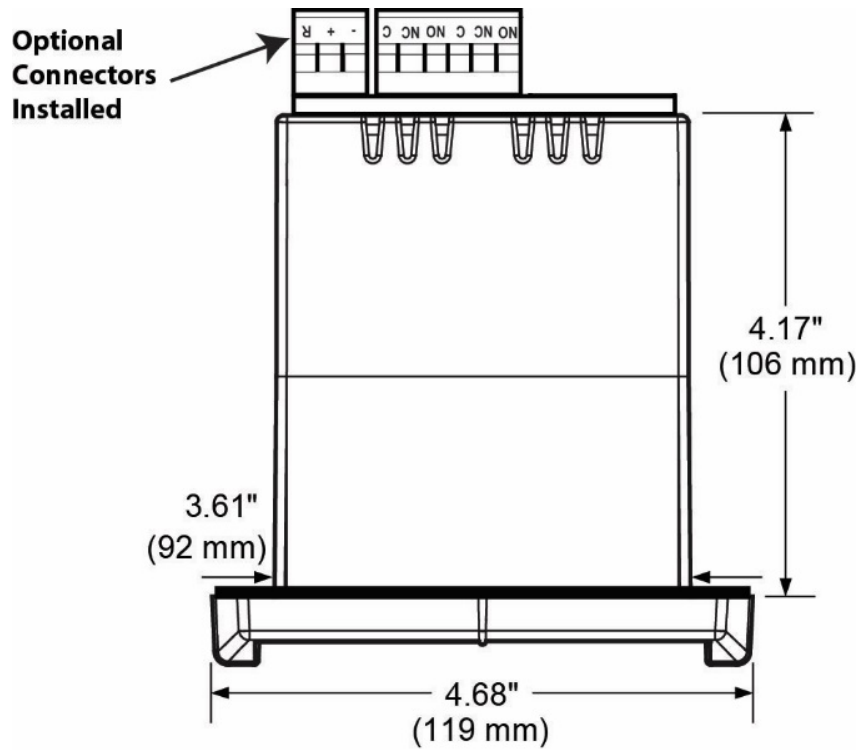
1/8 DIN Panel Cutout and Mounting
